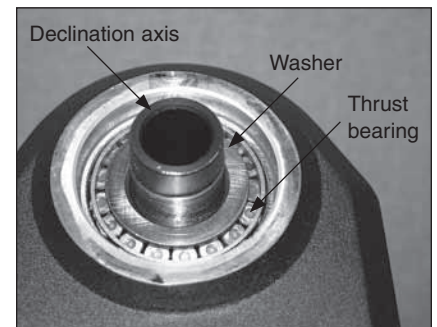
View of the thrust bearing after the counterweight shaft collar is removed.
